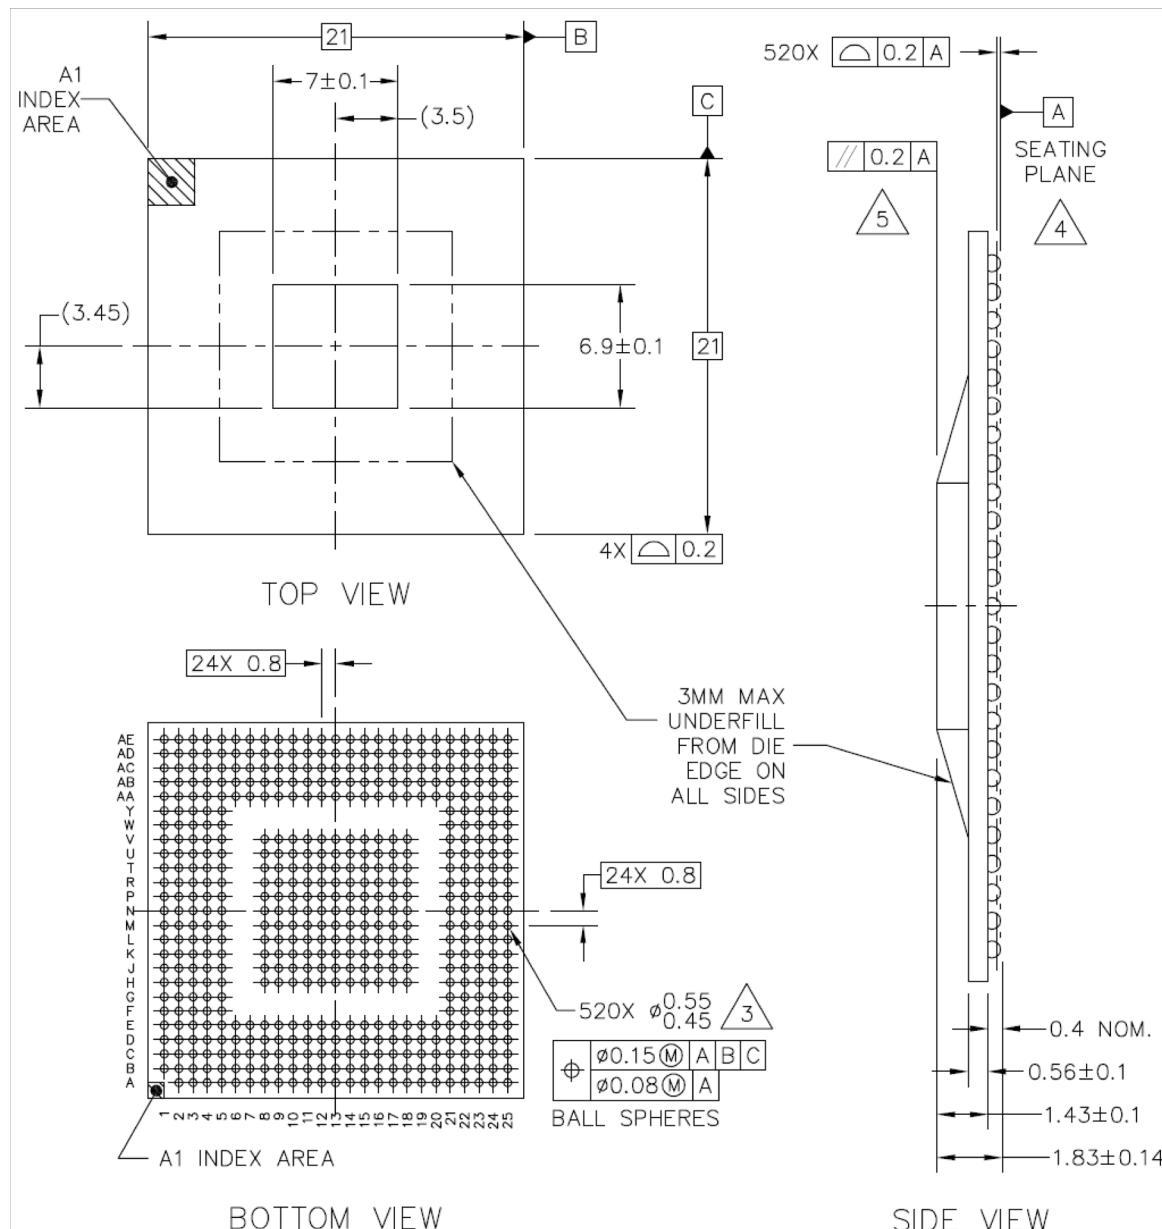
BSC9131 Mechanical Dimensions and Package Diagram
